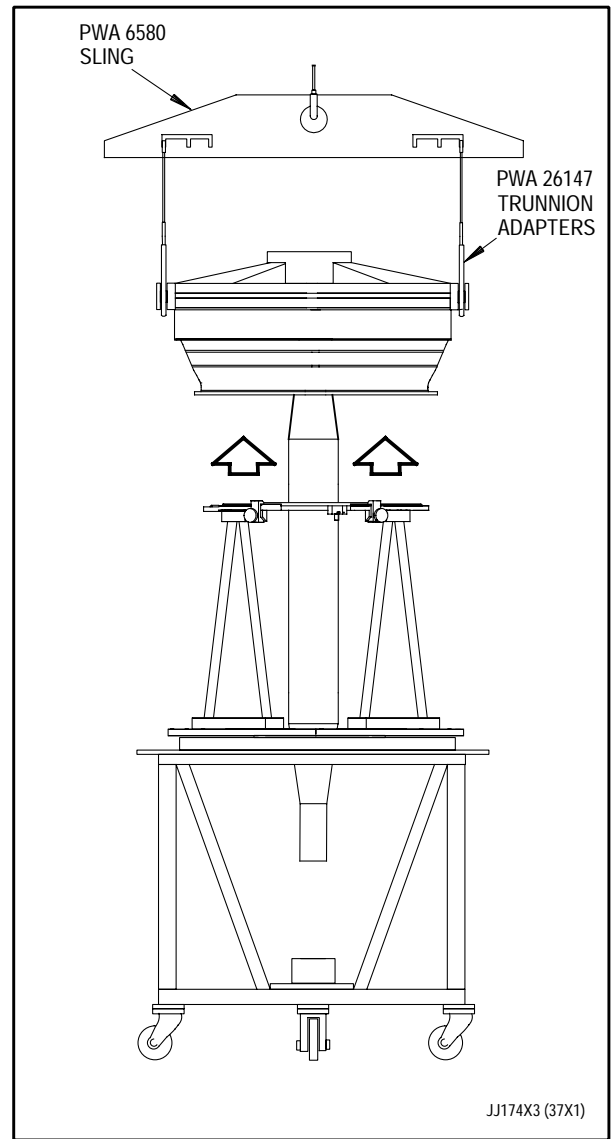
Front Compressor Drive Turbine Rotor and Stator - Installation into PWA 56338 Stand (Sheet 6 of 9)
